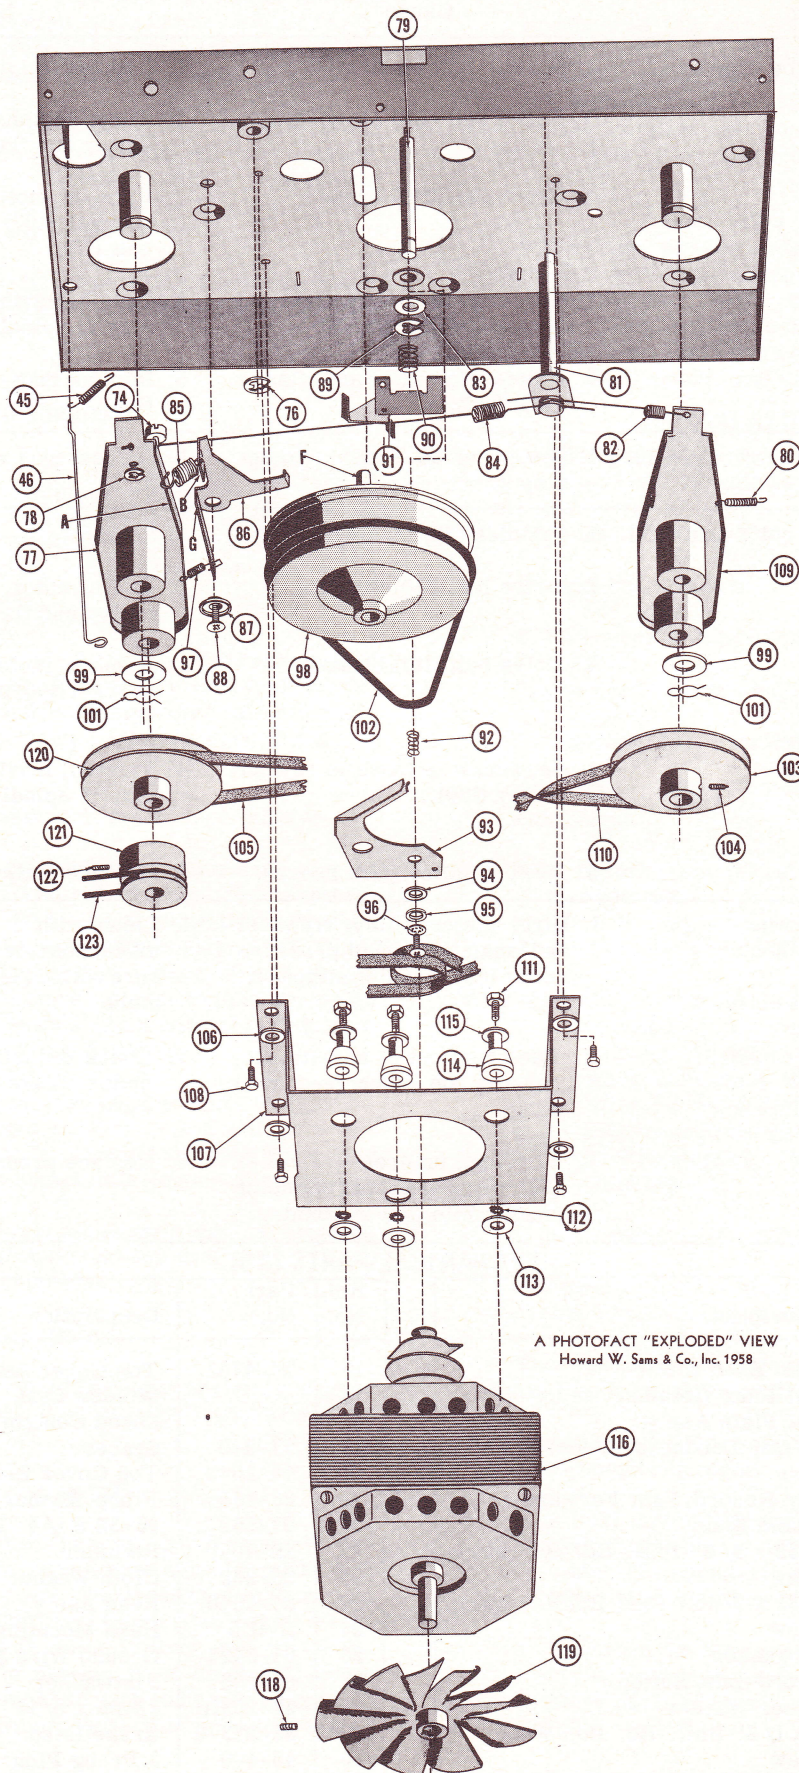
A EXPLODED VIEW OF PARTS ABOVE BASEPLATE
